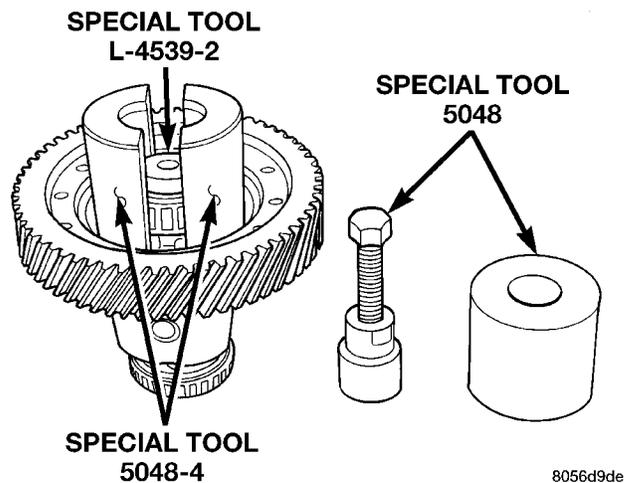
Remove Differential Bearing Cone (Extension Housing Side)
